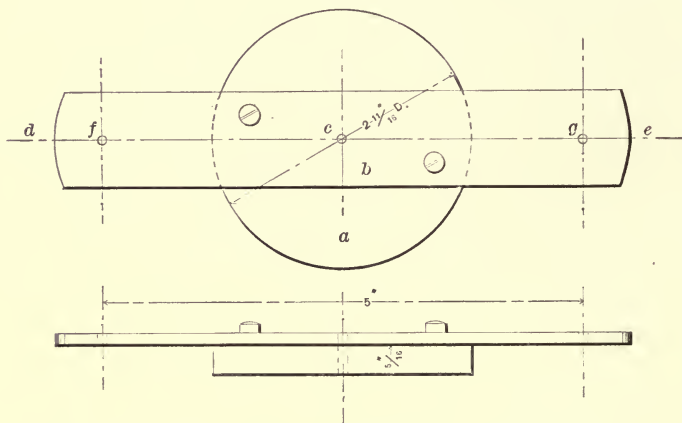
JIG FOR HOLES IN CYLINDER COLLAR LUGS.
